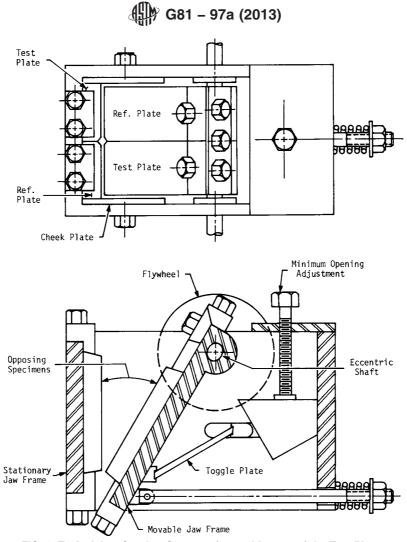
Typical Jaw Crusher Construction and Layout of the Test Plates
